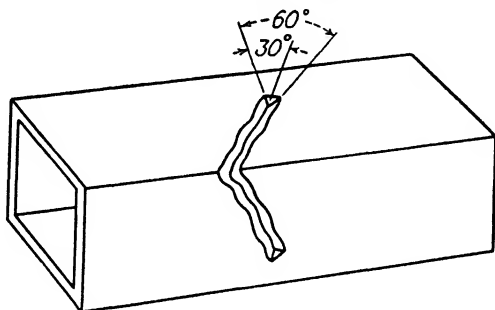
Cracks should be vee'd out right to the bottom and the sides cut at 30-deg. included angle from the crack or 60 deg. total, to ensure weld penetration beyond the bottom of the crack.
